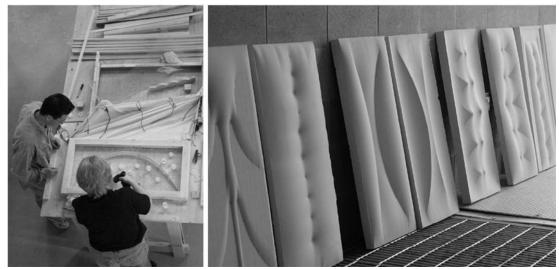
Model formwork and completed plaster casts (C.A.S.T. photos).
